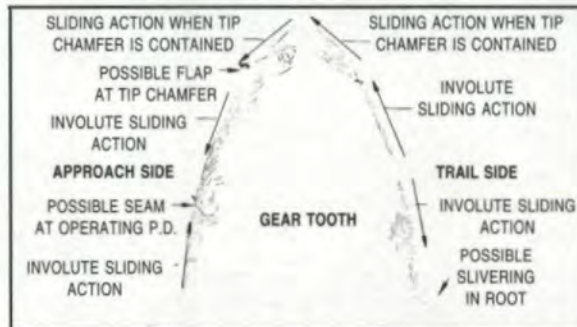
Tooth flow pattern that results when too much stock is left for roll-finishing, or when material hardness is excessive.
